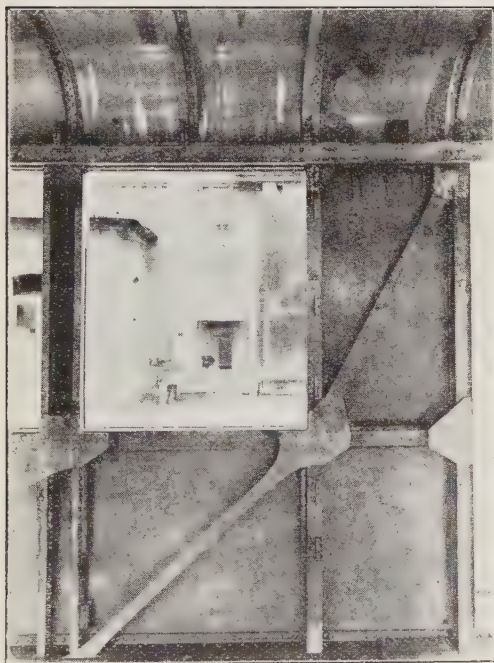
Inside view of framing of a motor coach (fig. 12), without the interior lining.
